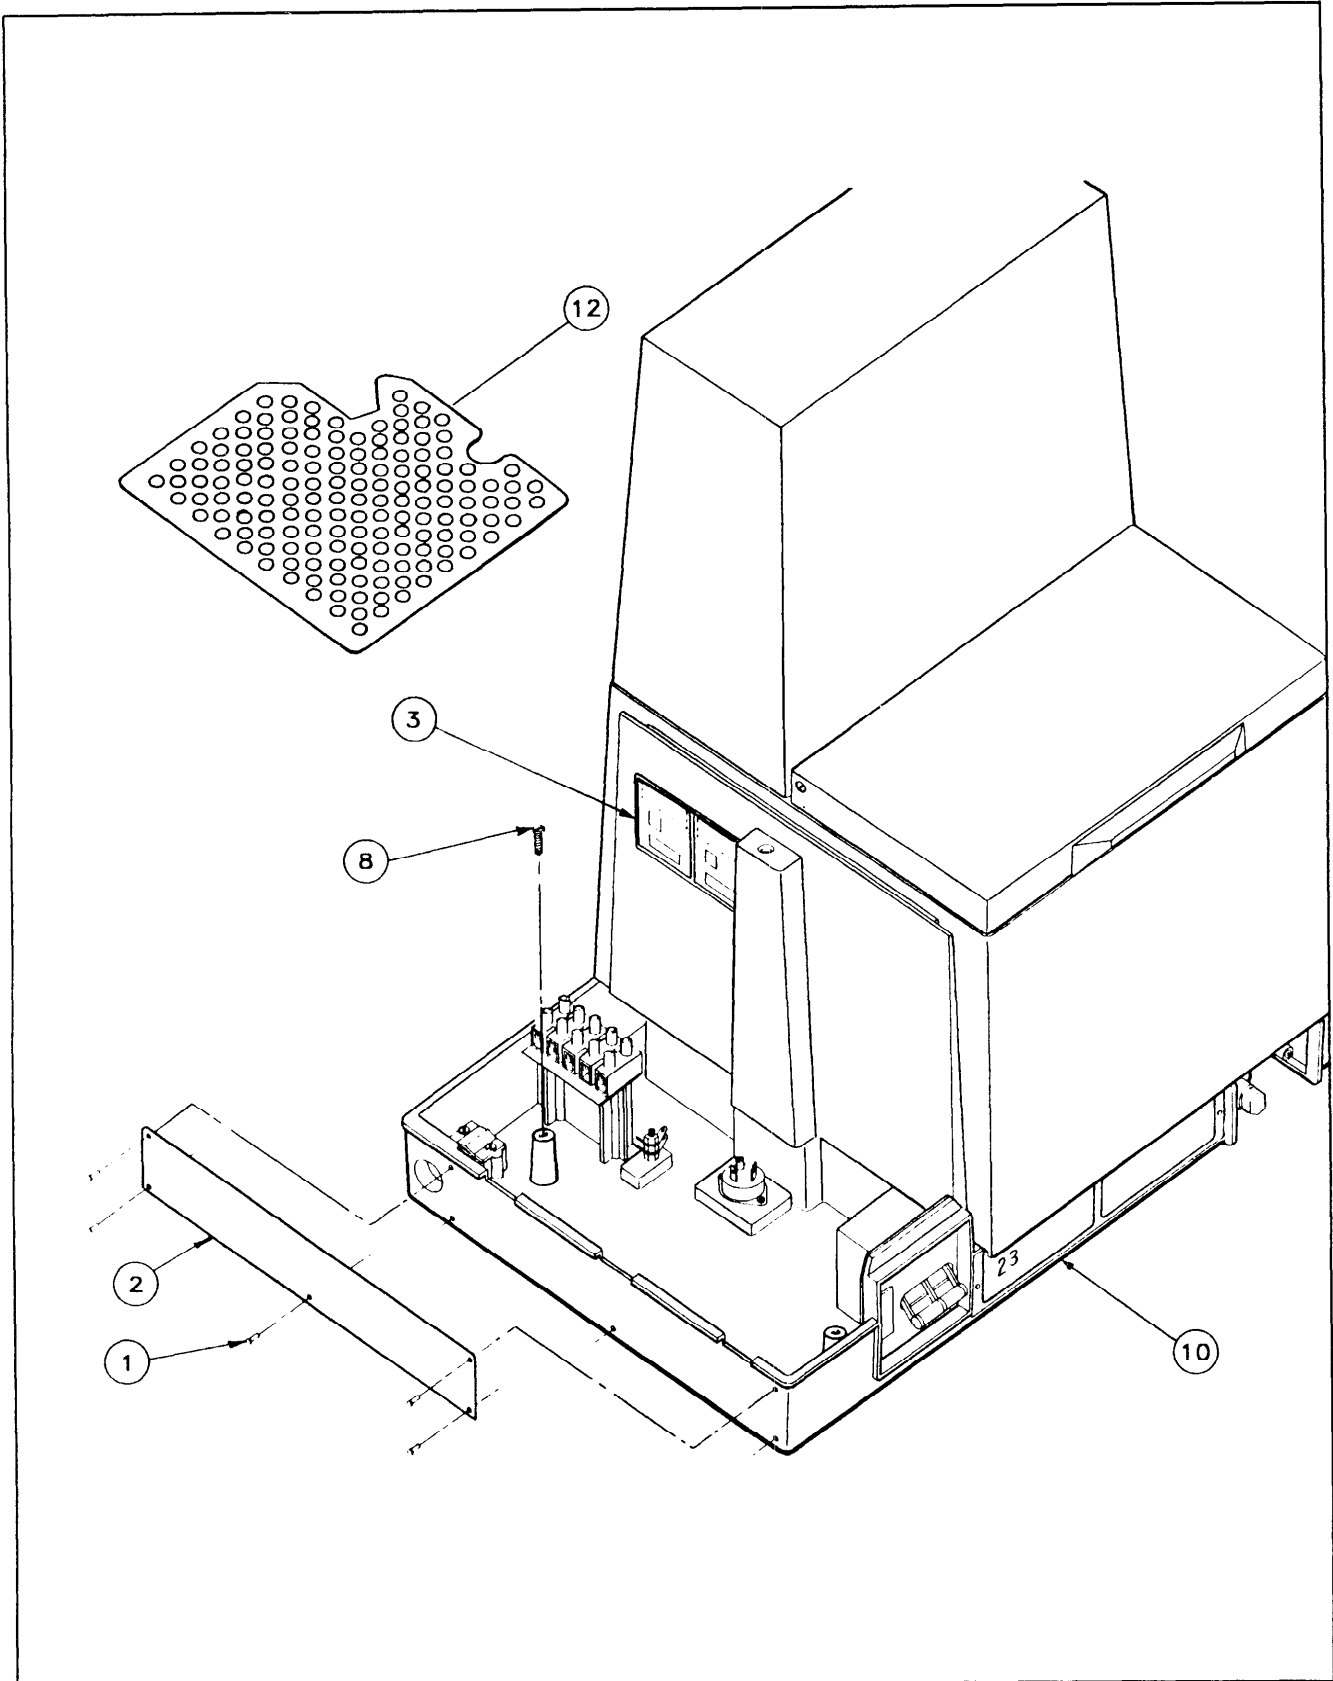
Series 2300 Unit Assembly (Drawing 2 of 2).
